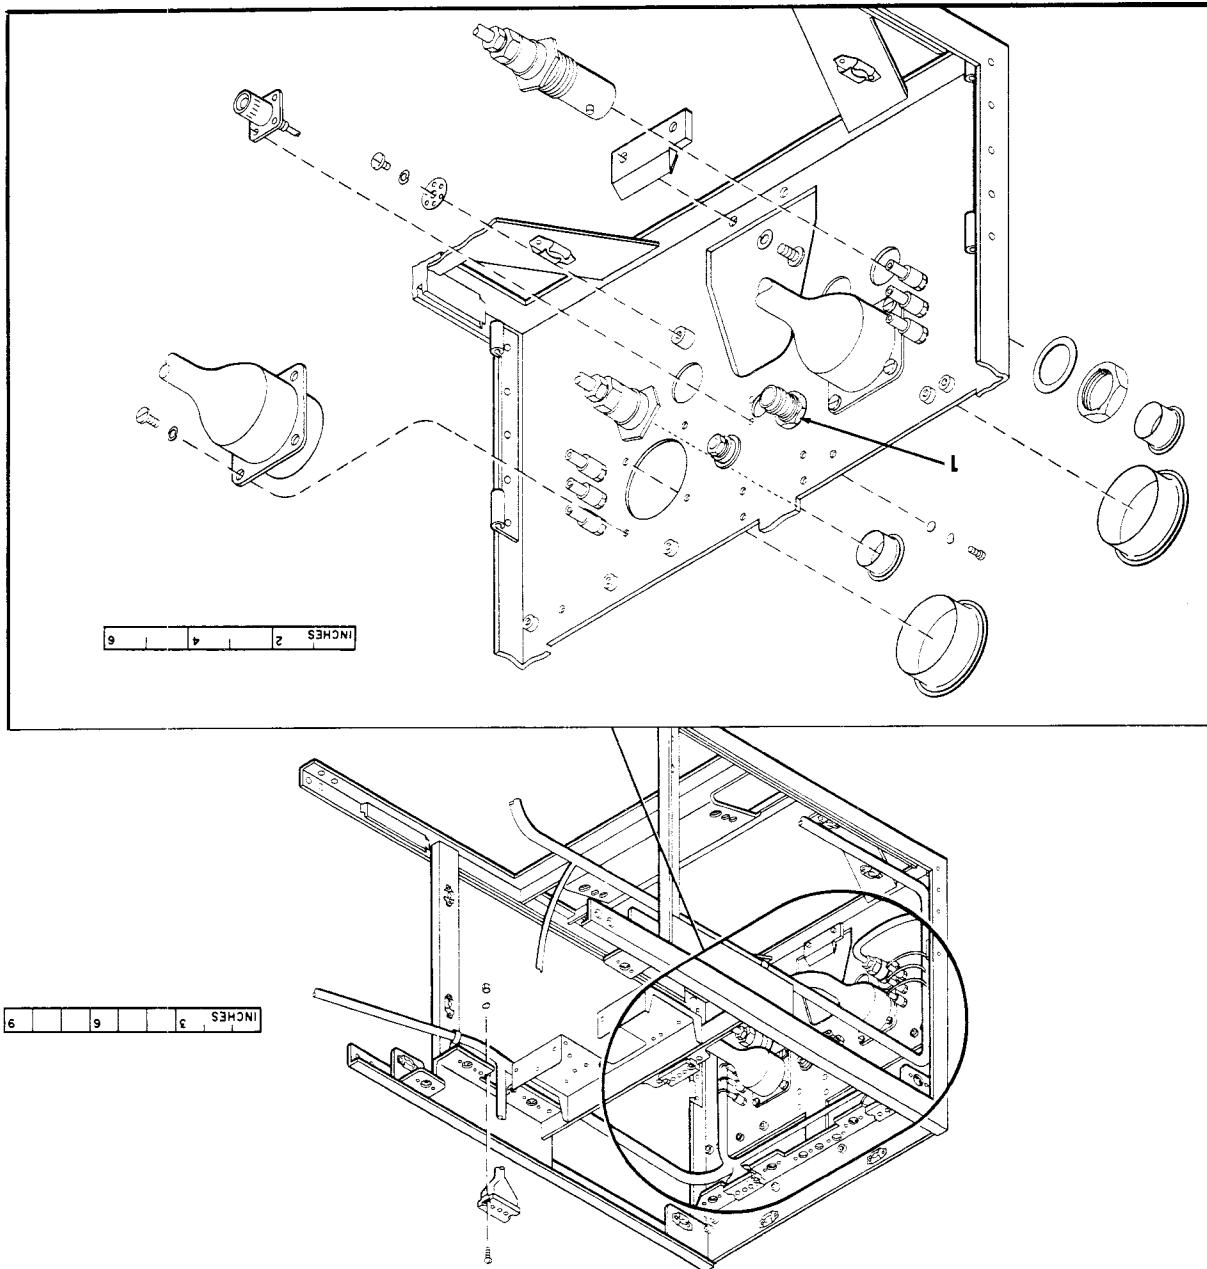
Indicator, azimuth range (9993732) - partial exploded view
